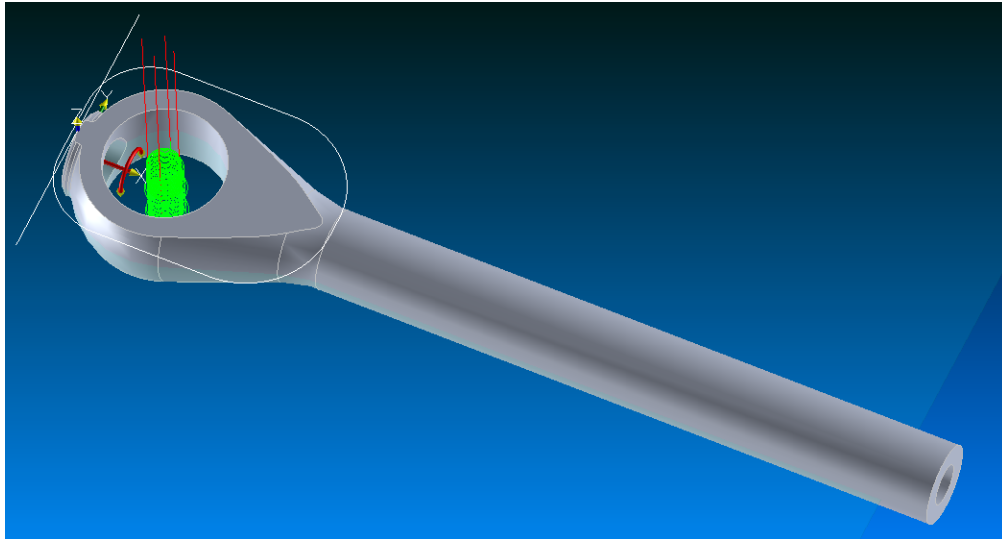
OP03, Contour Mill Center Hole to $\text{Ø}0.5600$ inches
